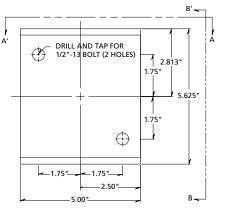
" x 6" RAIL WITH WELDED PLUG SIDE ELEVATION
